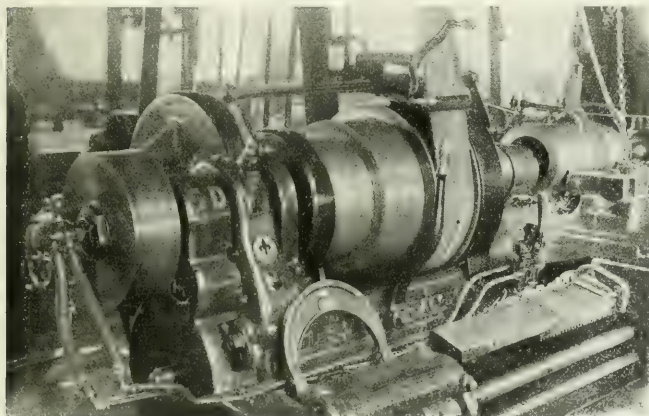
FINISH TURNING LATHE SIMILARLY EQUIPPED TO FIG. 4. BUT WITH AIR CYLINDER OPERATING SIX-DOG EXPANDING ARBOR.
